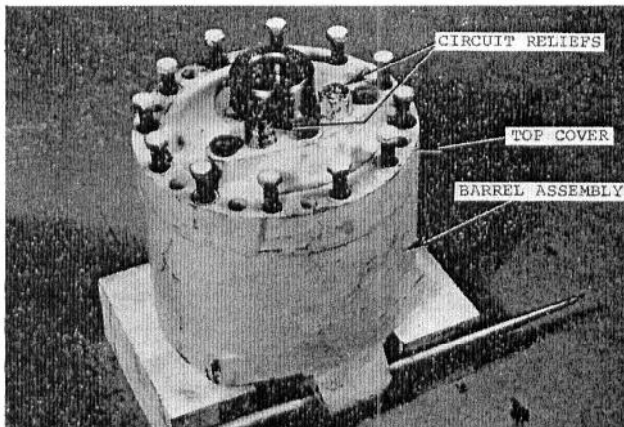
MF Part No. 708 714 M92 Cylinder on Blocks for Servicing
